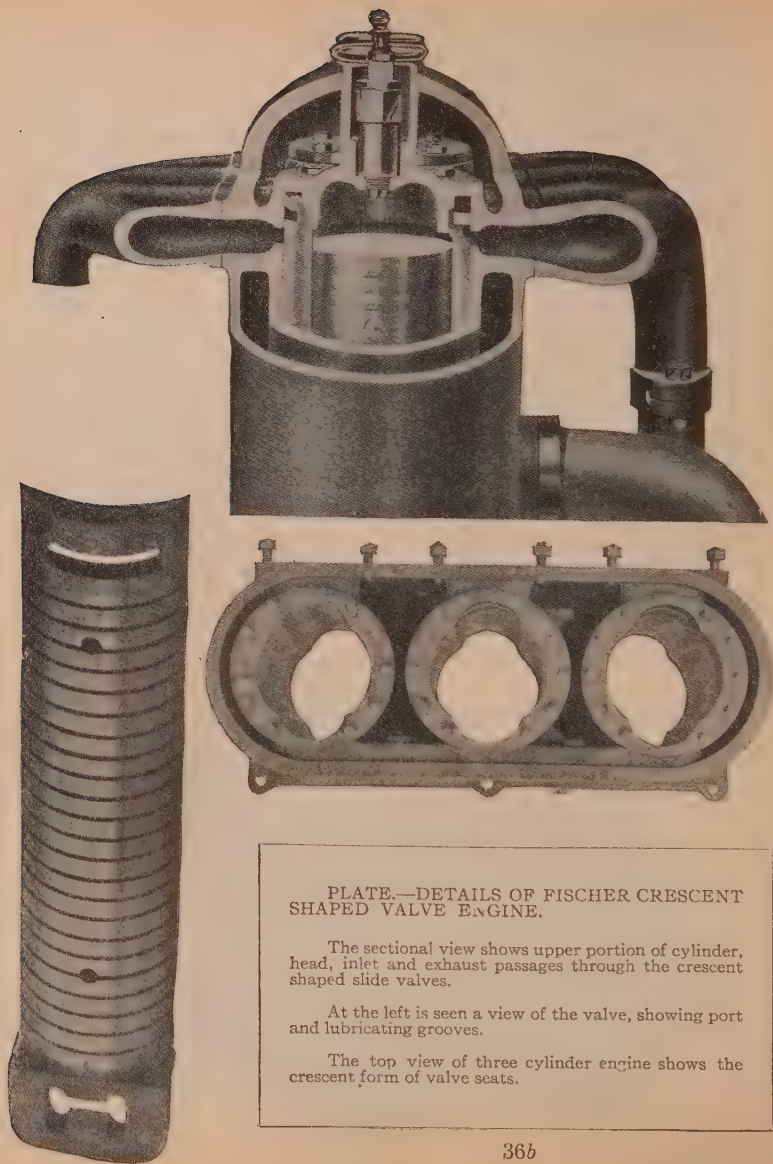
PLATE.—DETAILS OF FISCHER CRESCENT SHAPED VALVE ENGINE.
